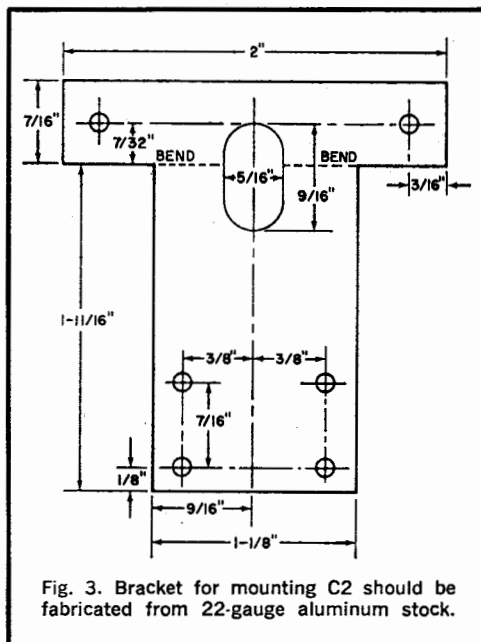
Bracket for mounting C2 should be fabricated from 22-gauge aluminum stock.
